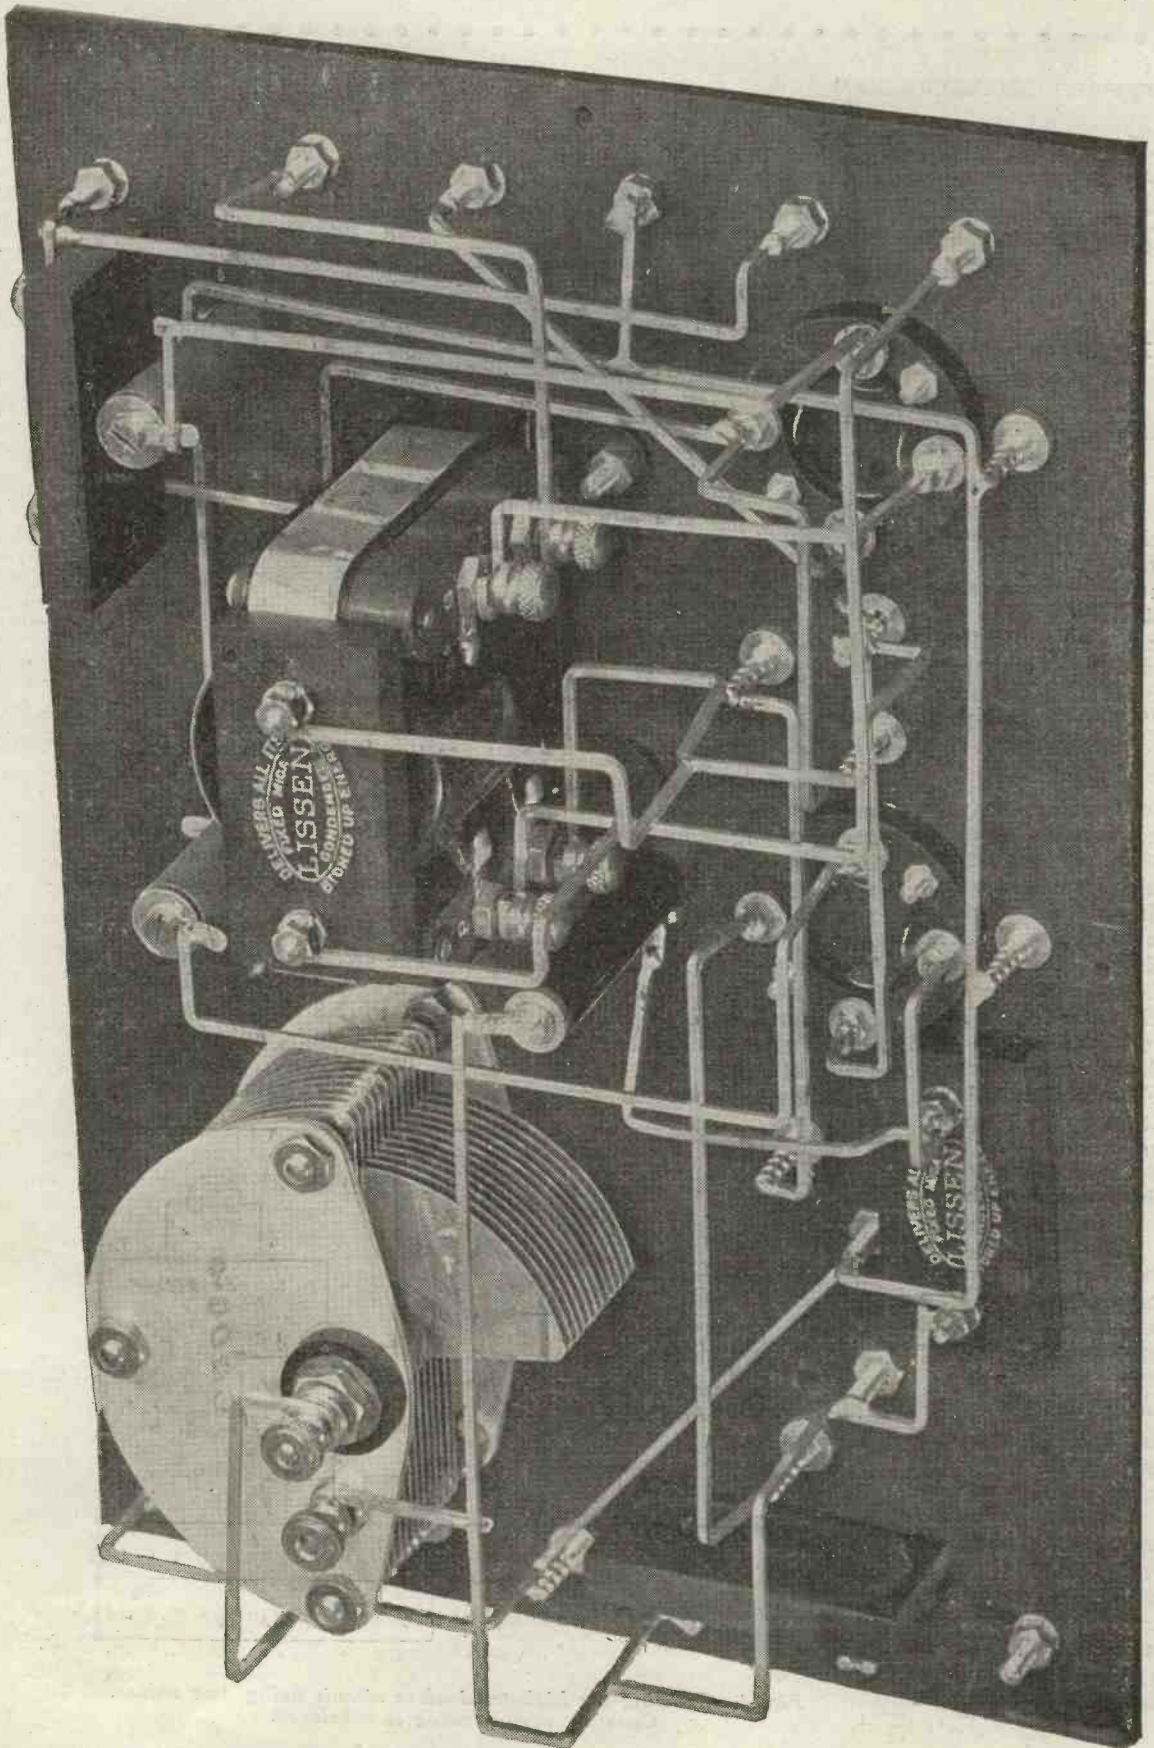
A photograph of the back of the panel showing the layout of the parts and wiring.
